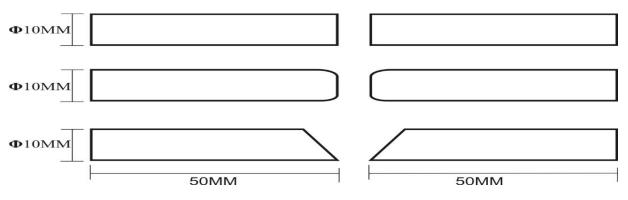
Shape of the Mild Steel Rod Welding Samples.
